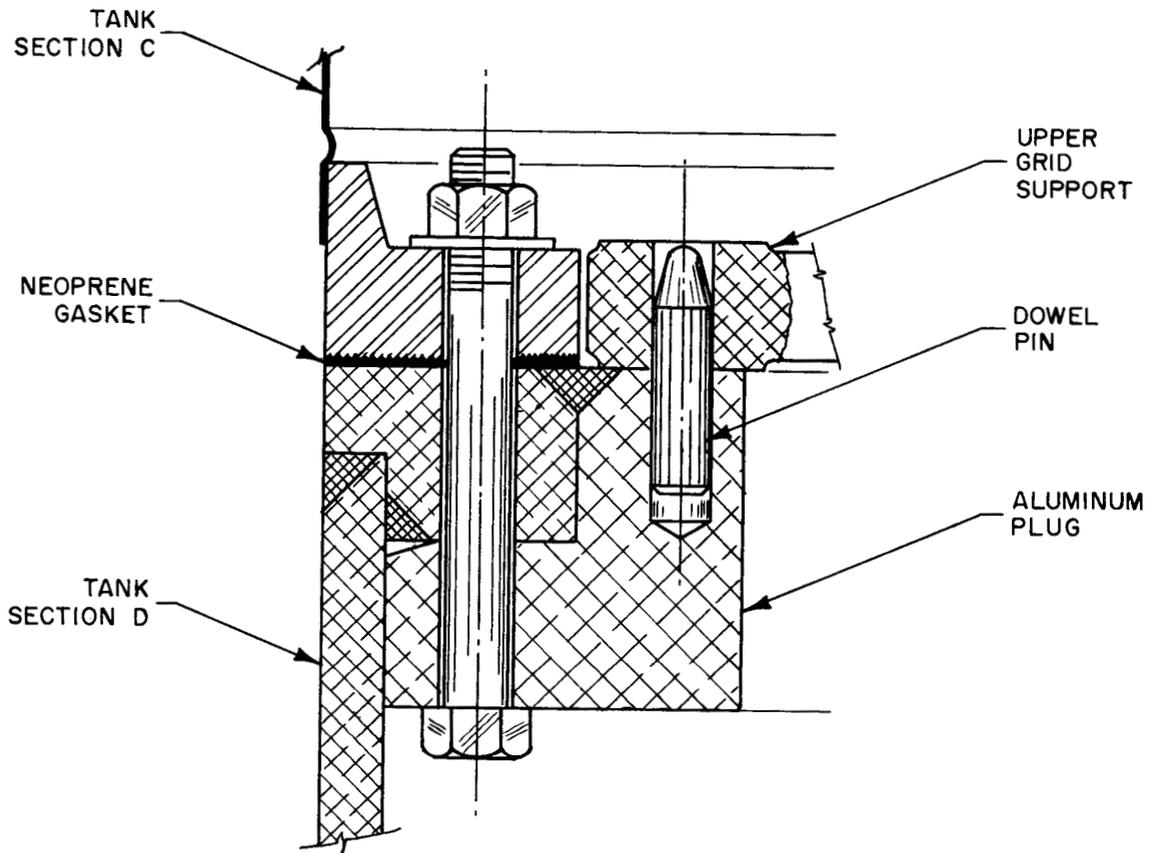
Flanged Connection Between "C" and "D" Tank Sections
